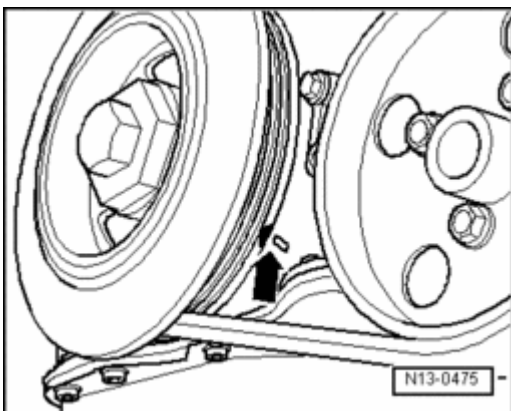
Identifying Crankshaft At Vibration Damper Securing Bolt In Engine At TDC Cyl. 1
